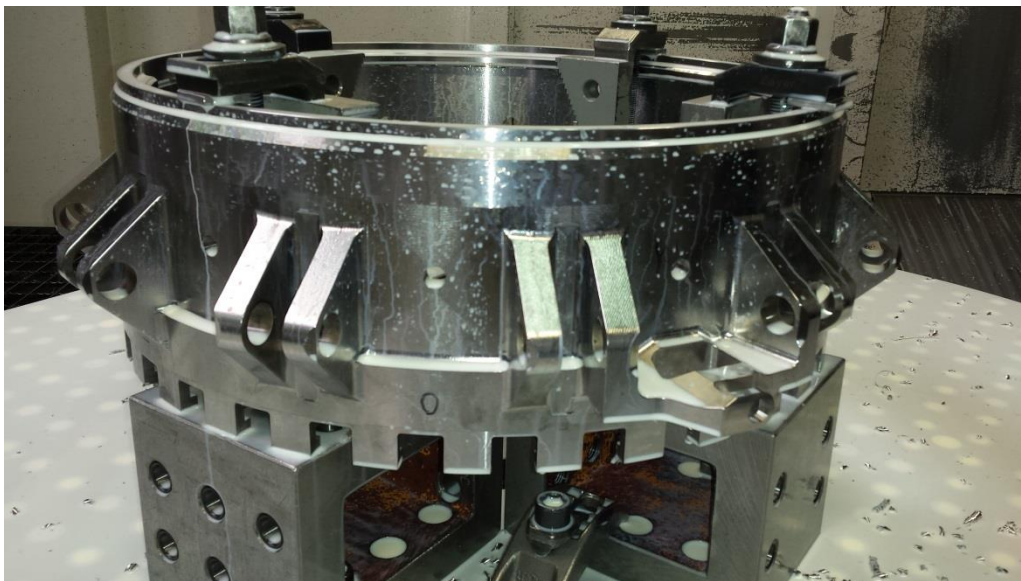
LTB Outer Guide during milling @ Germany machining plant
